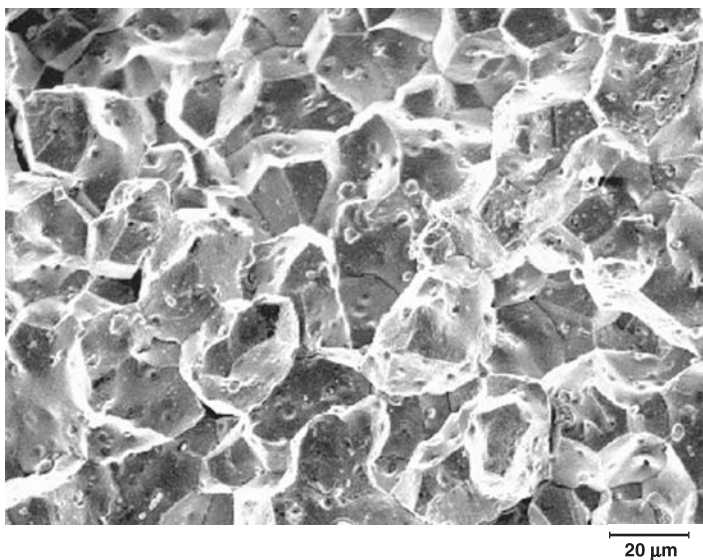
SEM fractograph of an intergranular fracture caused by hydrogen embrittlement in a high-strength steel component
